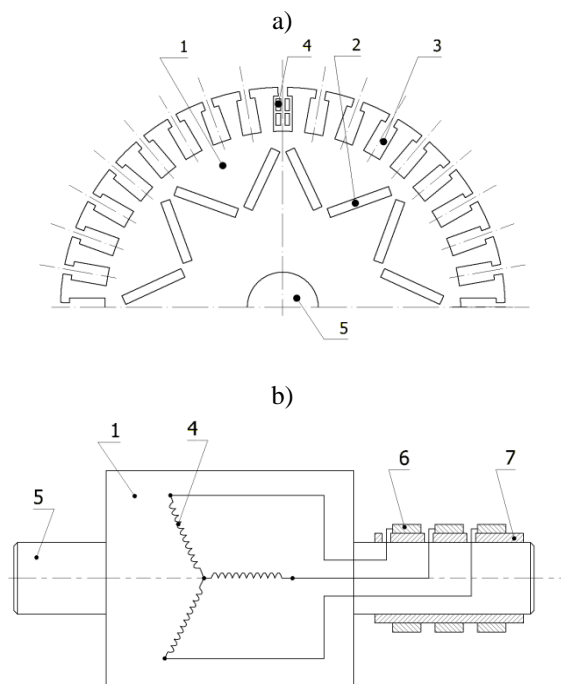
Rotor of a synchronous motor with permanent magnets: a) cross-section of the rotor, b) star-connected winding with phase ends connected to slip rings
